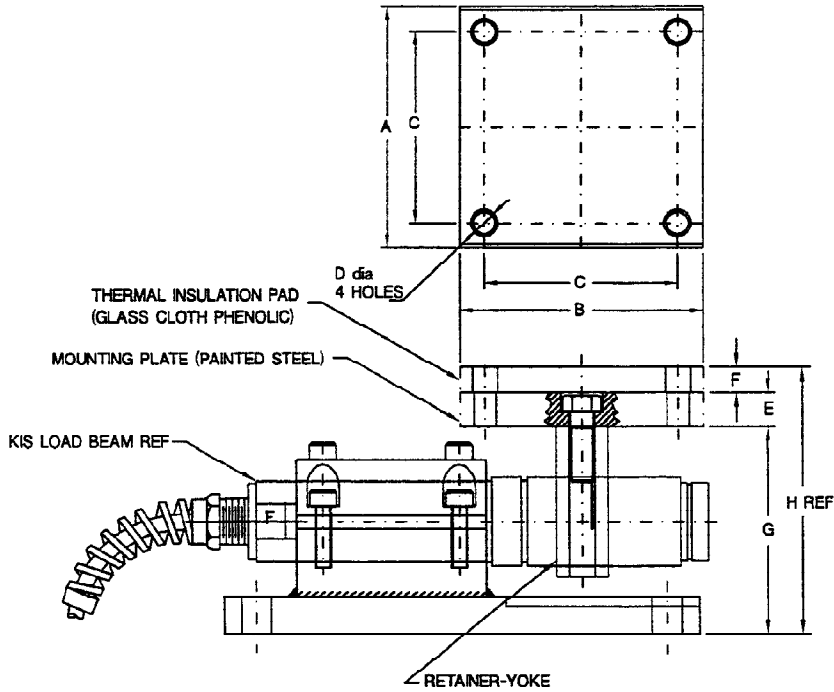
KIS Weigh Module Outline Dimensions
